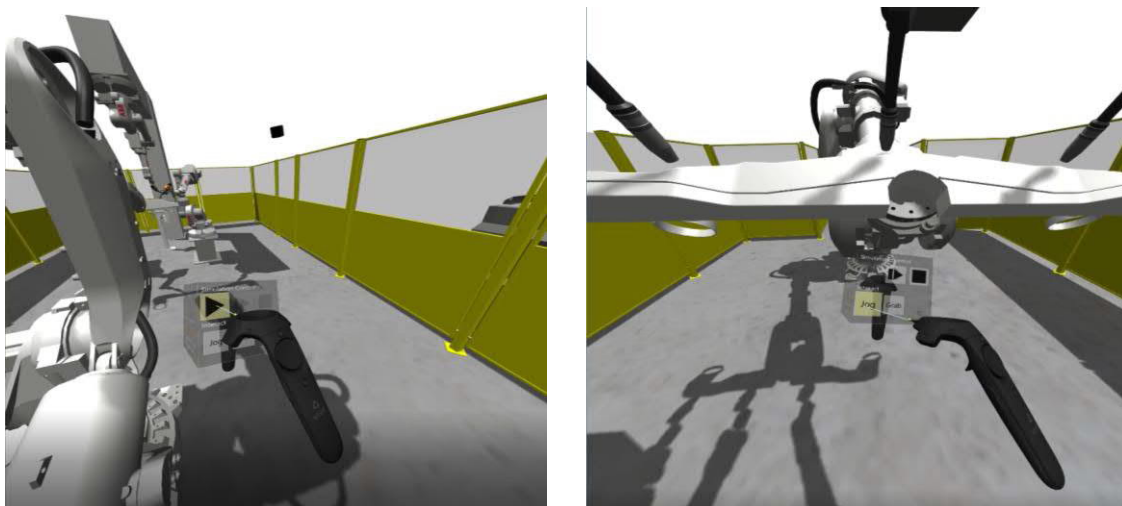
Display of HTC VIVE controller as used to spot welding through VR environment.
